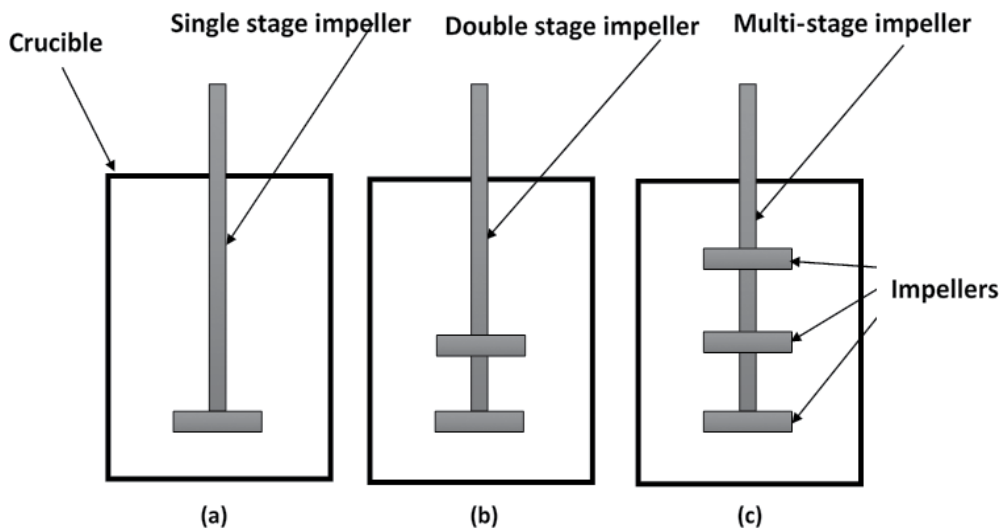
(a) Single stage impeller stirrer, (b) double stage impeller stirrer, (c) multistage impeller stirrer.
